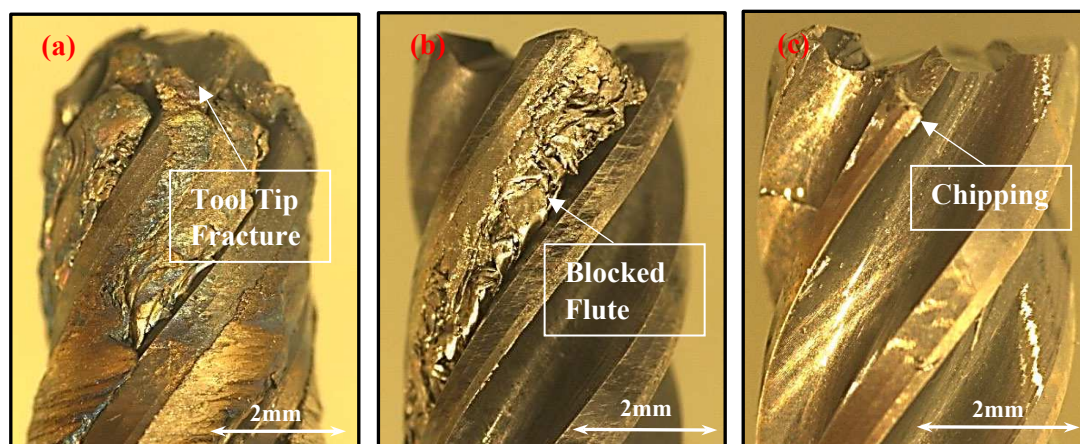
Tool wear micrographs displaying: (a) adhesive failure, (b) adhesive failure with a flute blockage, (c) tool tip chipping.
